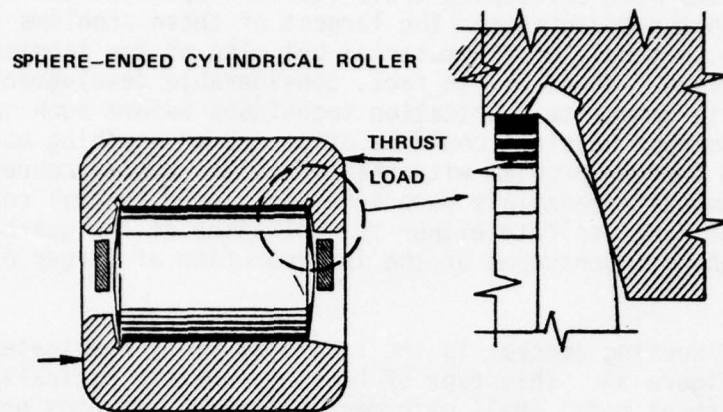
Cylindrical Roller Bearing With Thrust Capacity.
